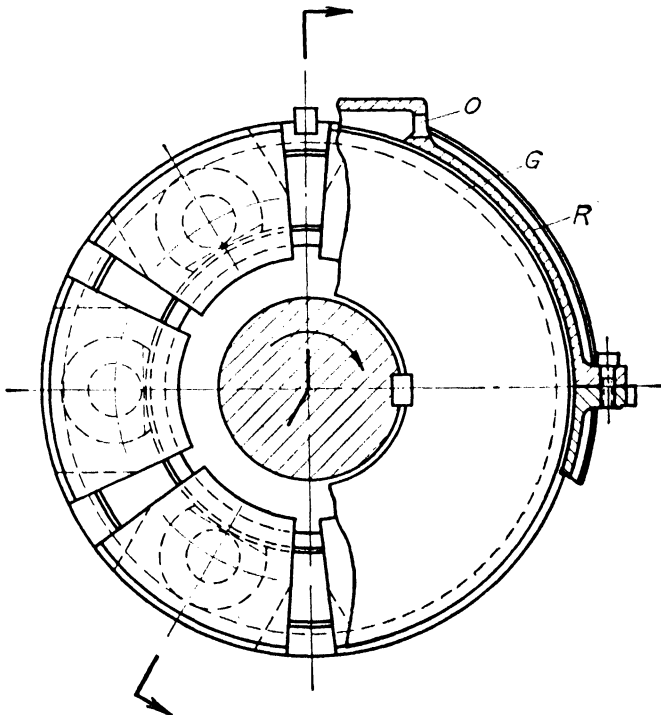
Thrust bearing designed for very high rotative speeds,
